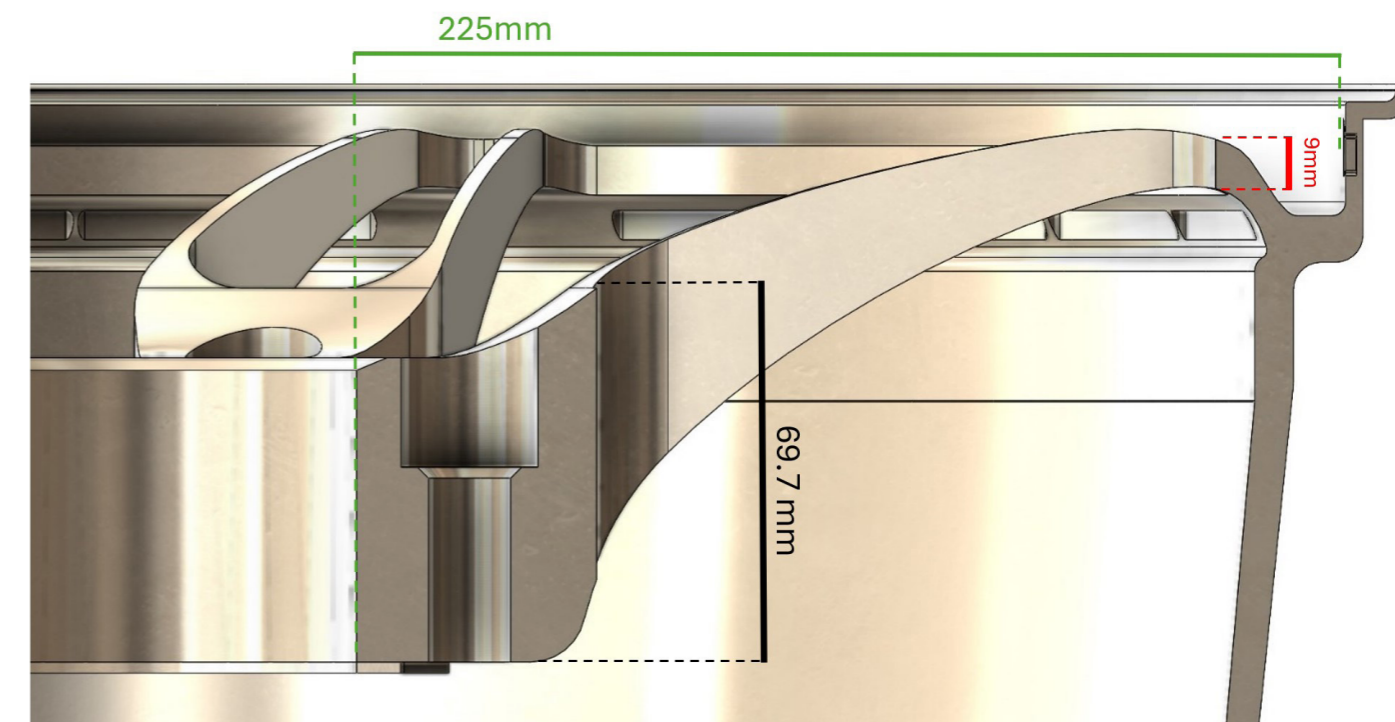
Cross Section of CB1, main spoke measurements - side view
